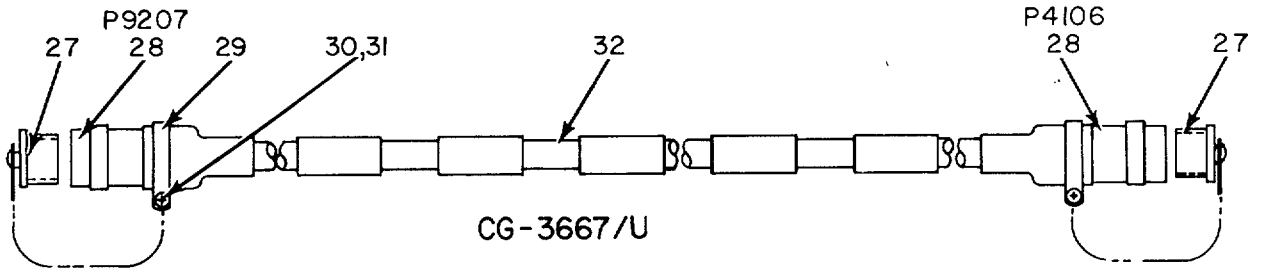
Cable Assemblies, RF and Power (Sheet 2 of 3).
